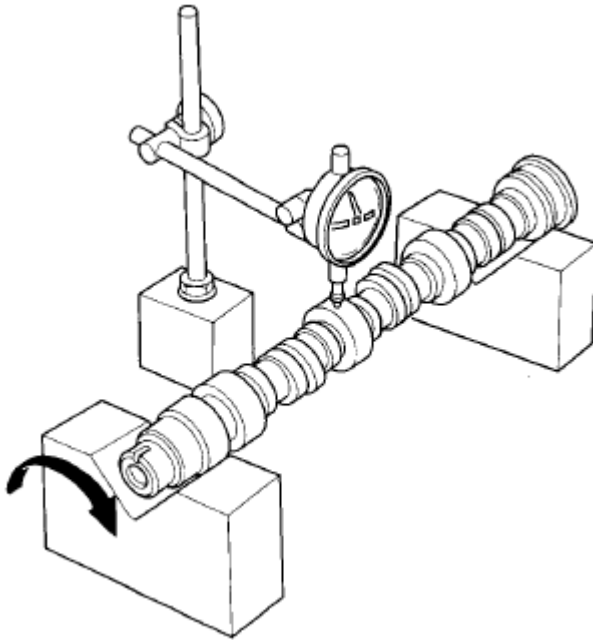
Turning Camshaft For Inspection Using Dial Gauge
